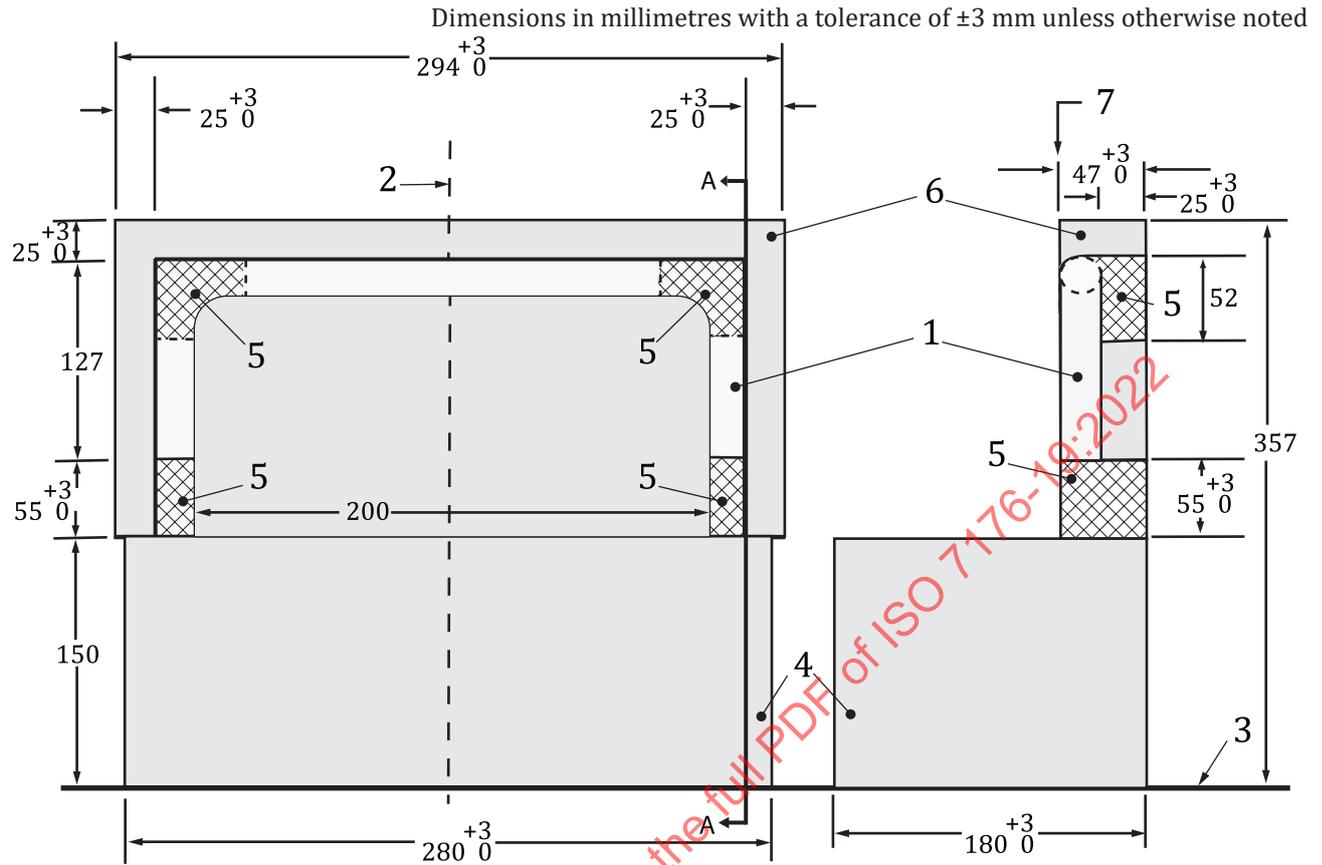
Specification for the vertical and horizontal location of a UDIG adaptor, (rear and side view)
